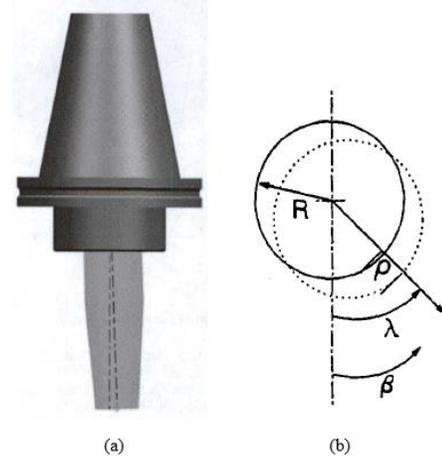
(a) cutting tool with axial run-out [13] (b) cutting tool path with radial run-out [14]
